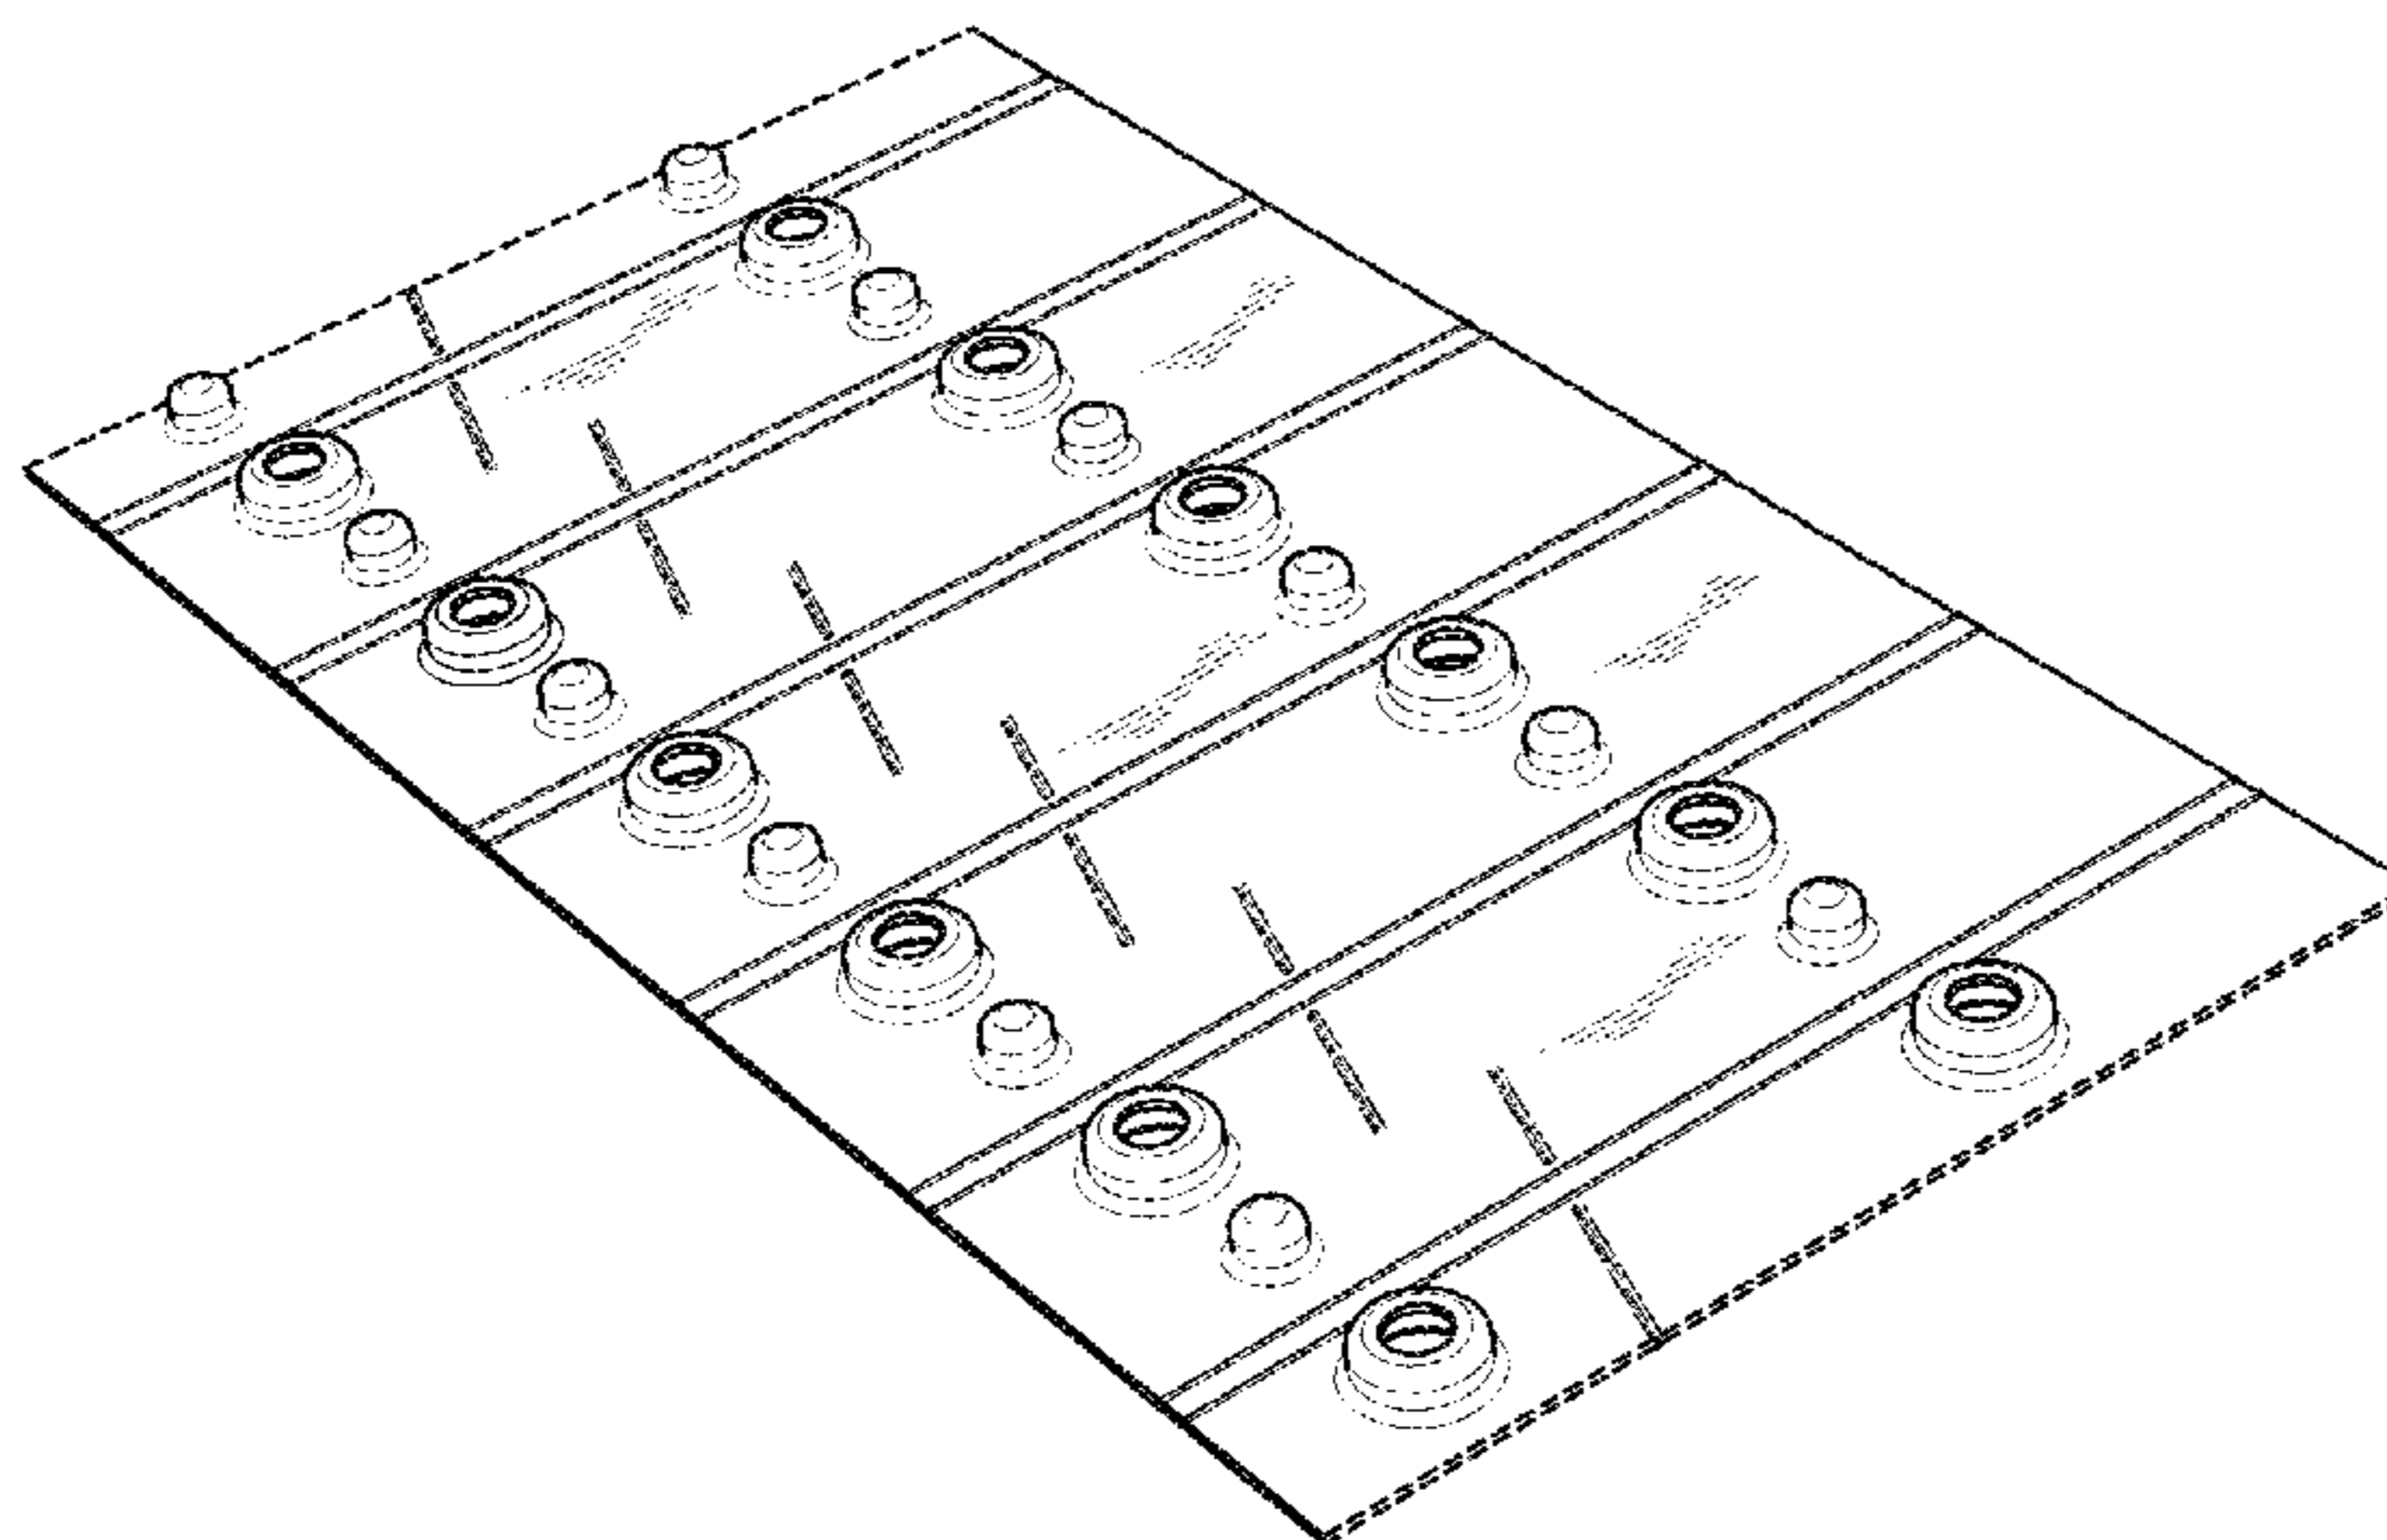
is a bottom perspective view of the design of FIG. 1; FIG. 3 is an end view of the design of FIG. 1 taken from the left-hand end of FIG. 2;
